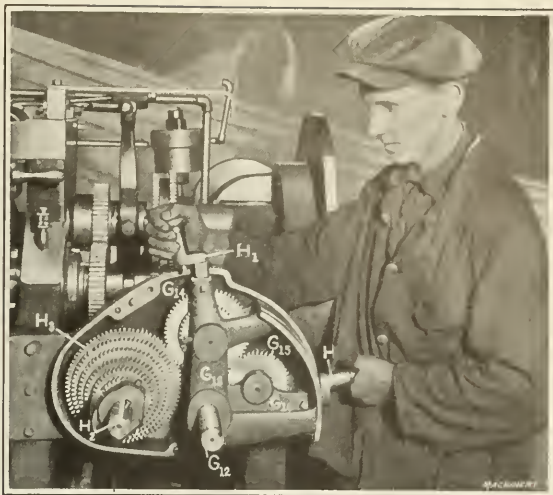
Operator shifting Position of Gears in Change-gear Box
